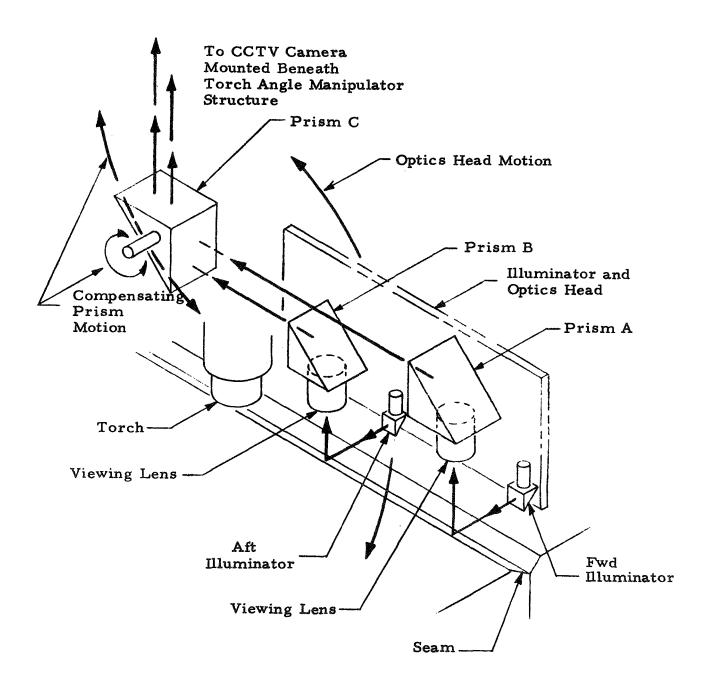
Seam Viewing Optics - Prism Configuration
